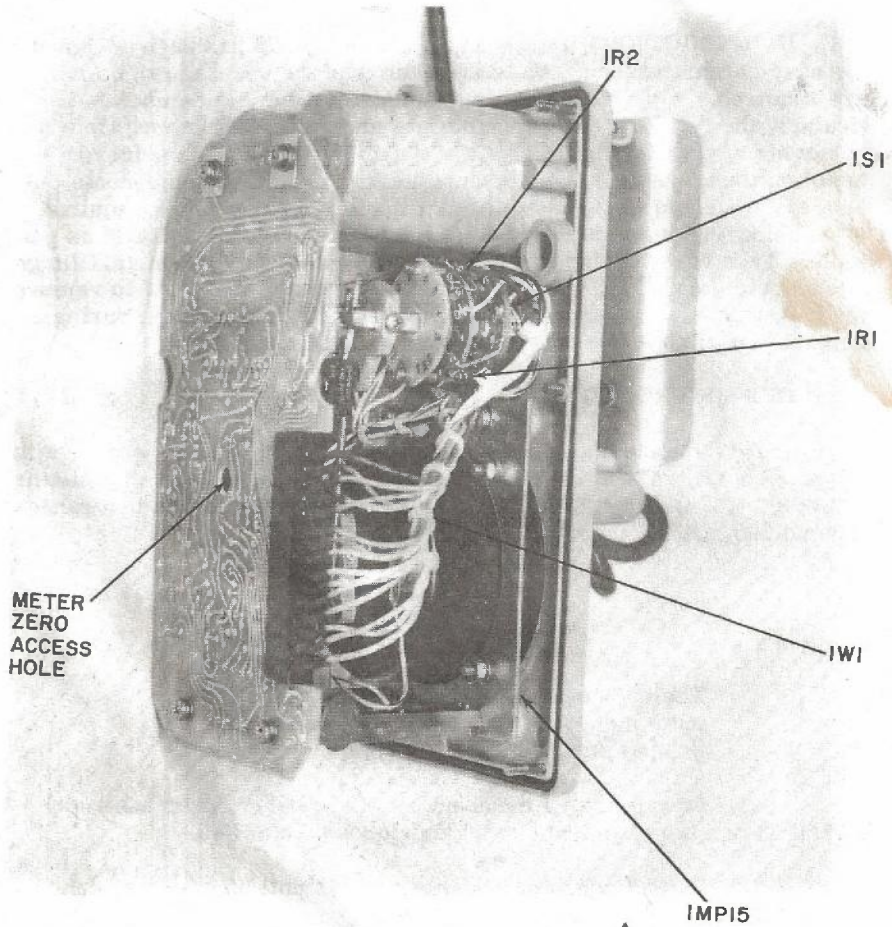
Radiacmeter IM-238/PDR-27S Right Side
